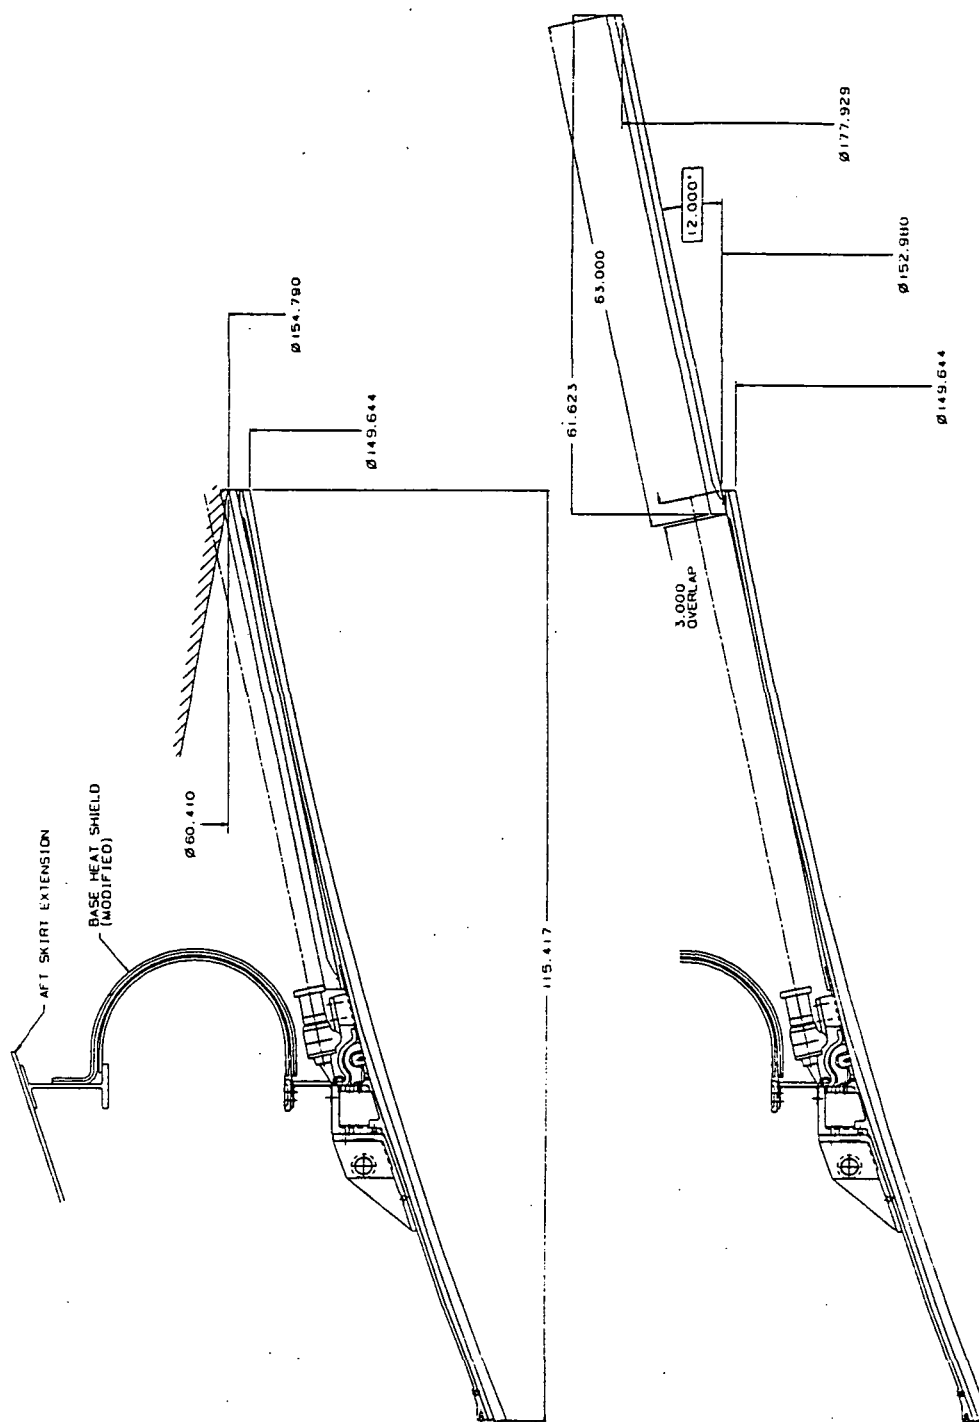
View of Aft HPN Exit Cone Assembly with SLEEC Installed
